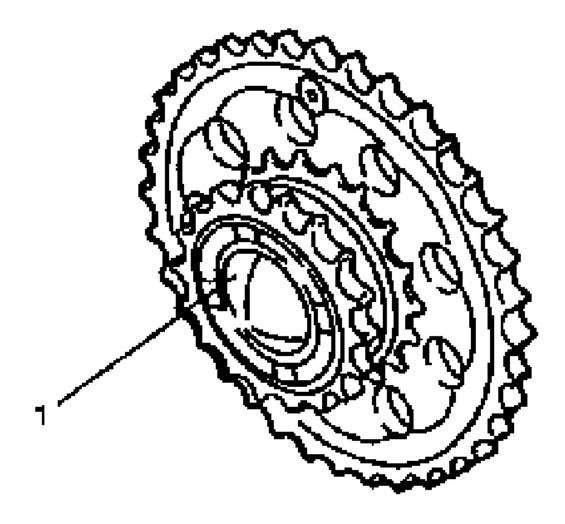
Identifying Idler Sprocket Teeth And Bush Courtesy of SUZUKI OF AMERICA CORP.
